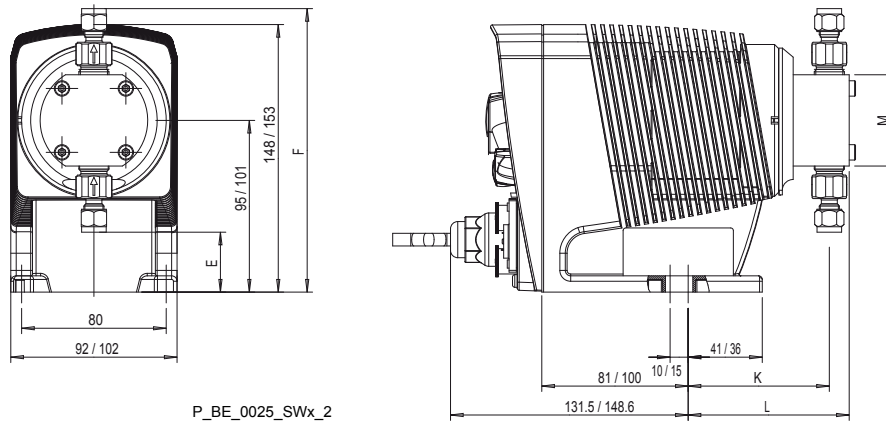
Dimensional drawing Beta b BT4b/BT5b, material version SS - dimensions in mm
